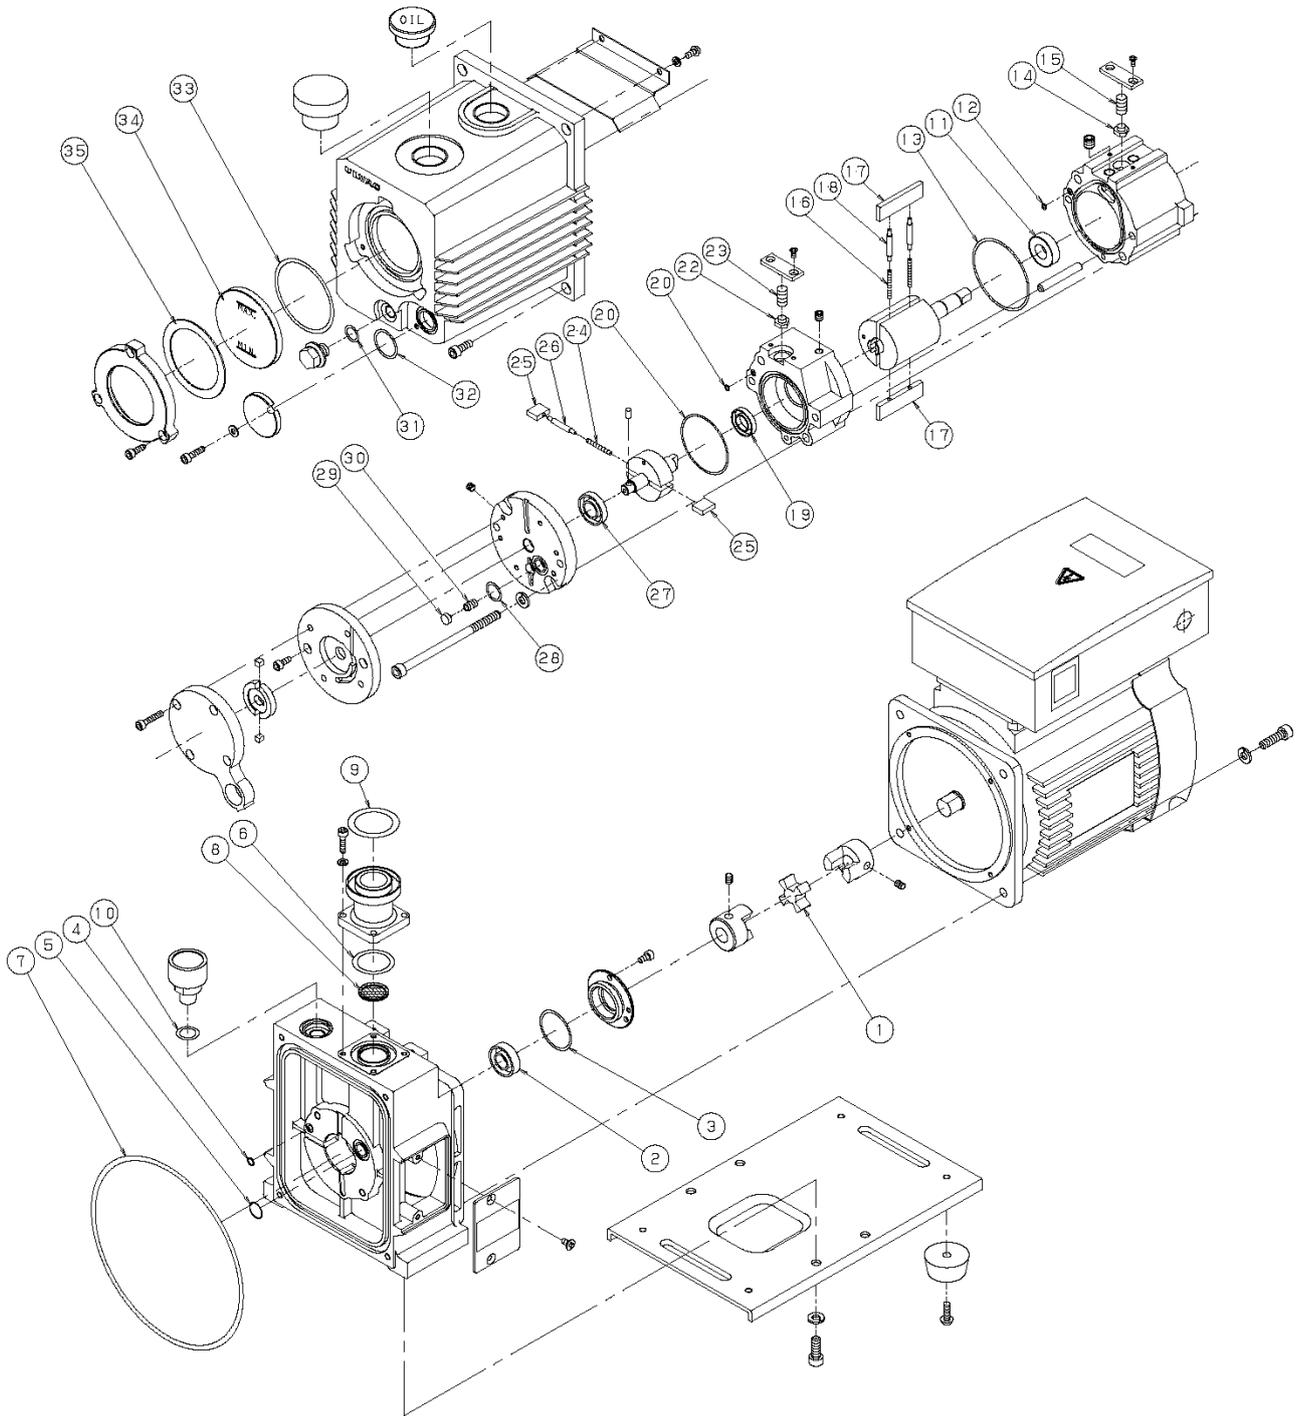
Disassembly drawing of GLD-040 oil sealed rotary vacuum pump
